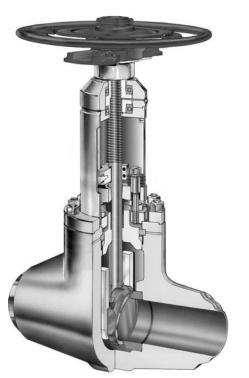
Rising-stem gate-valve design. (*Courtesy of Velan Valve Corporation*)
